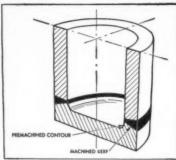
Bottom of hydraulic cylinder, typical of those used in heavy hydraulic presses.
